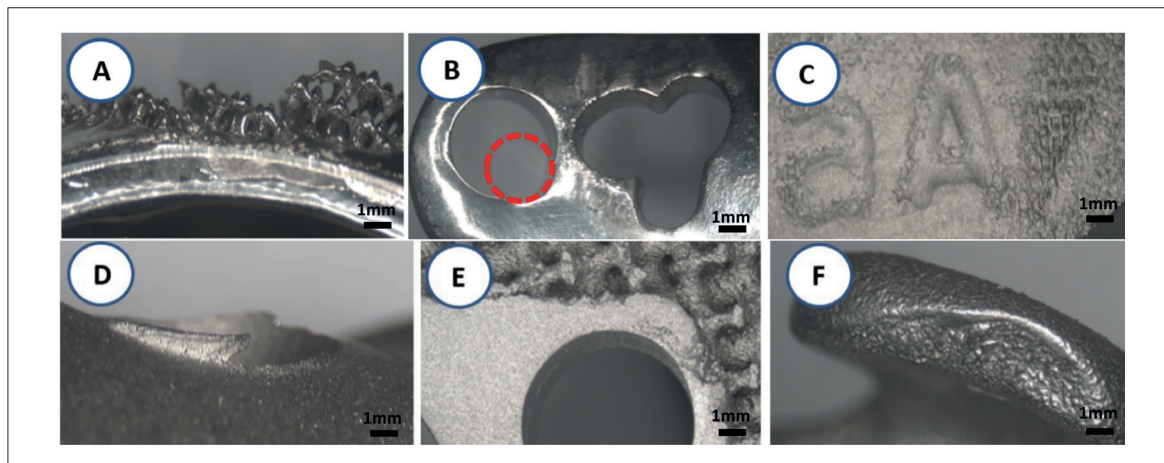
Superficial macrodefects identified during the visual inspection. (A) Lattice structure L2 partially broken in P1. (B) Hole manufactured in the wrong location and with the wrong diameter in P2. The red mark shows what the hole dimension and location should have been. (C) Residues of support material in P3. (D) Sharp edge from incomplete postprocessing in P7. (E) Cracks in the surface in P7. (F) Corner of the extra cortical plate broken in P8.
